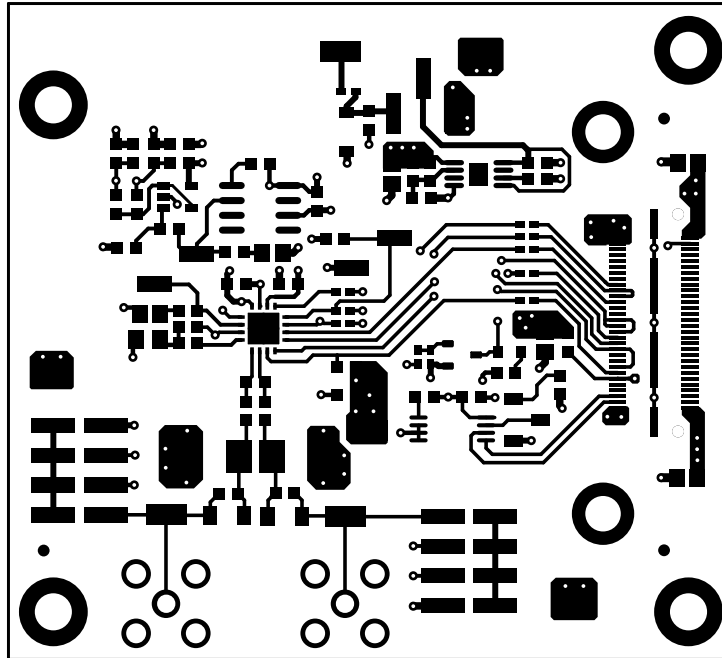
ADS8681WEVM PCB Layer 1 – Top Layer
